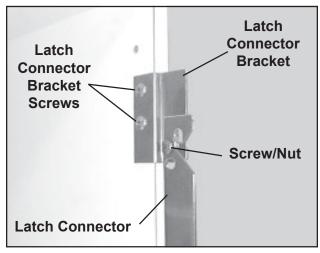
Top Latch Connector Bracket & Latch Connector (Bottom Similar)
